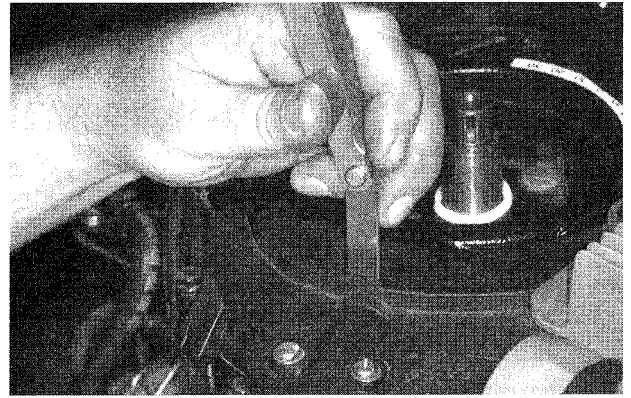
Checking the crankshaft position sensor air gap on 75-175 hp V4 and V6 motors
